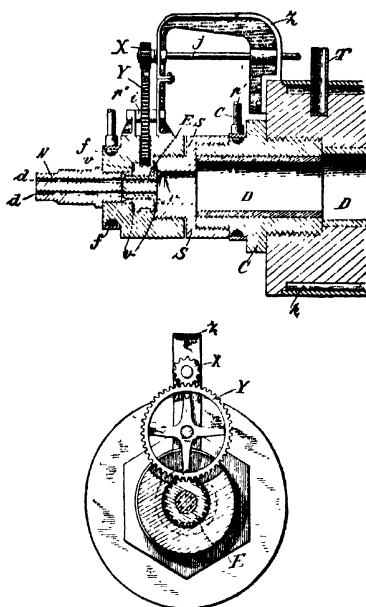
The Gillmore Stuffing Machine for Manufacturing Pyroxylin Rods and Tubes.
